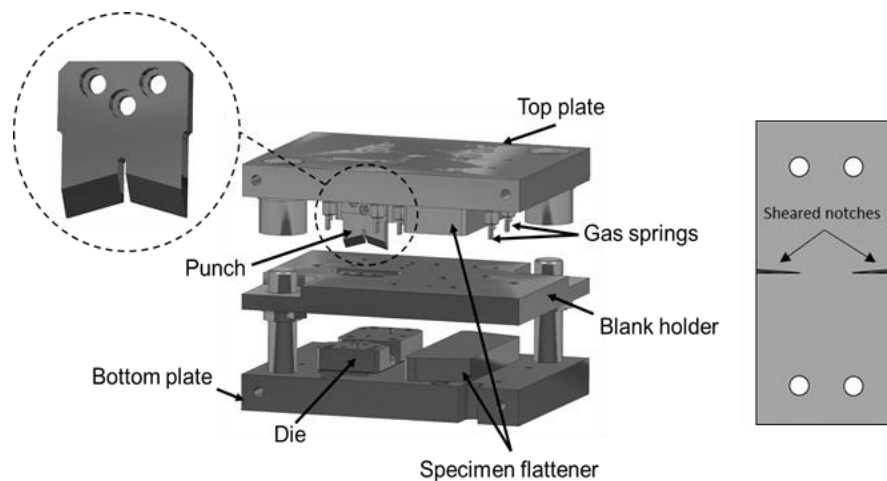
Left: Tool for introducing sharp notches in sheet metal specimens and detail of the bevelled punch. Right: DENT specimen with sheared sharp notches
